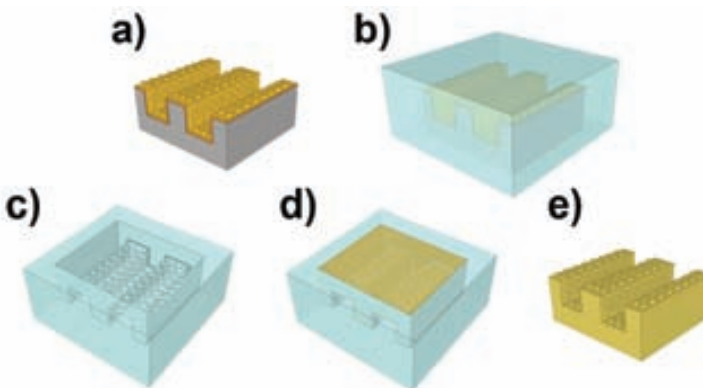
Fabrication process used for obtaining a three-dimensional epoxy resin component.
